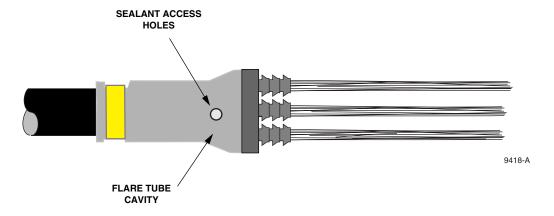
Injecting Sealant (Protective Tubing Not Used)
